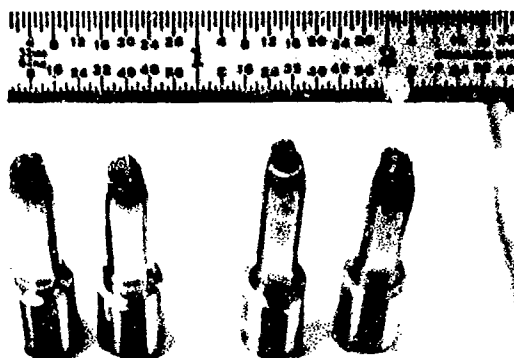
Fractured HP-9-4-25 Tensile Specimens: Axial direction, room temperature test, removed from 1.4-inch thick section
